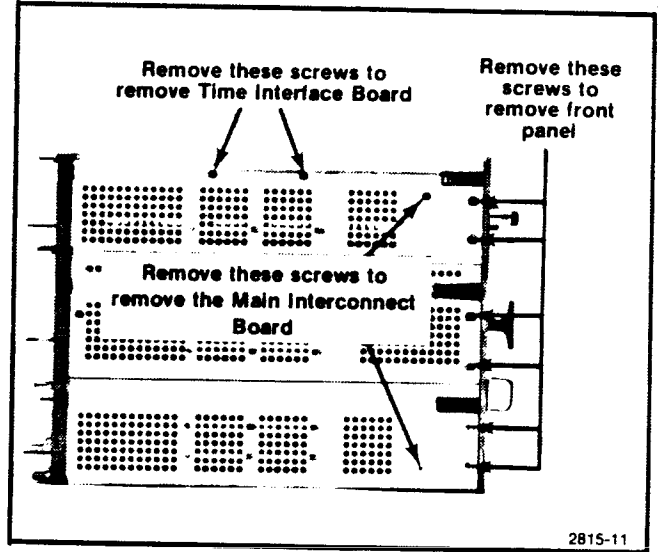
Bottom view of CG 5001/CG 551AP.
